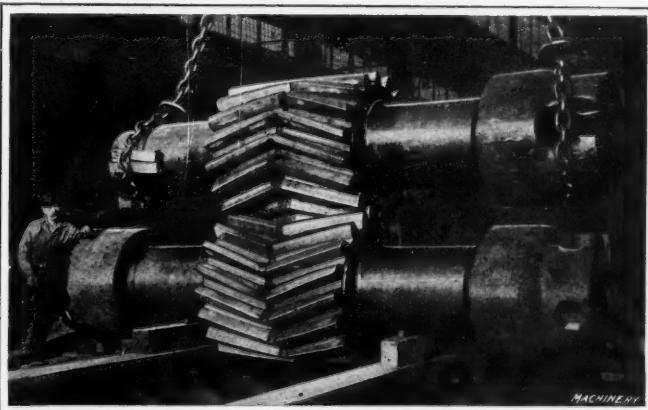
Large Herringbone Gear which had Teeth planed on Machine
